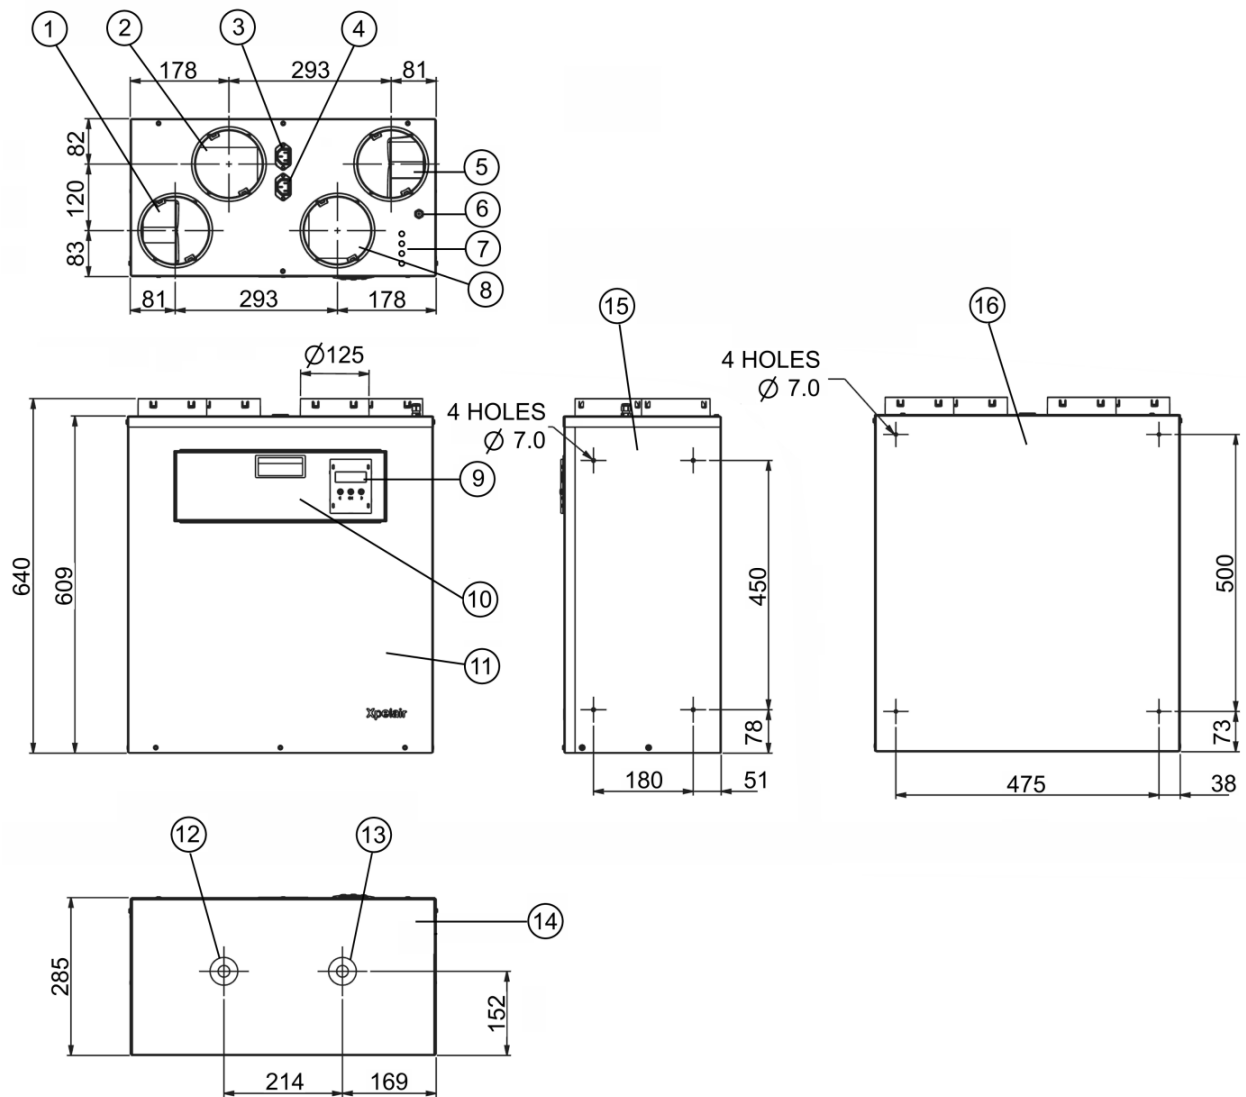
Dimensional drawing, Natural Air 180 ventilation unit
